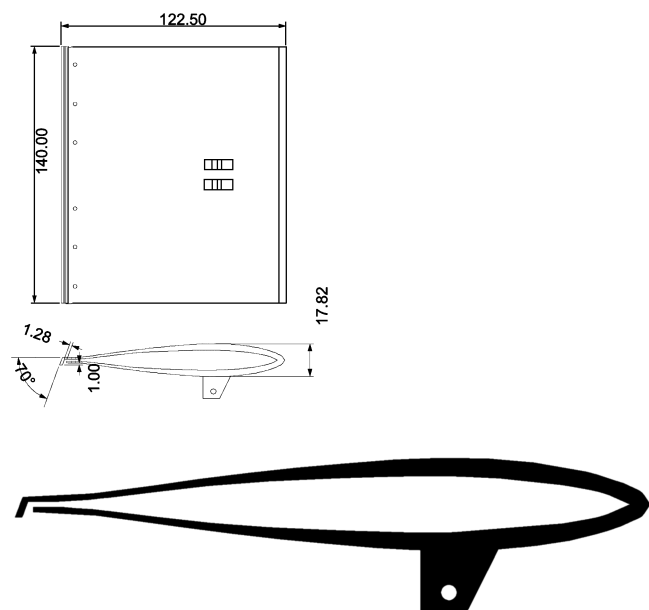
Sectional view through test model and model geometry, with dimensions in millimeters.
